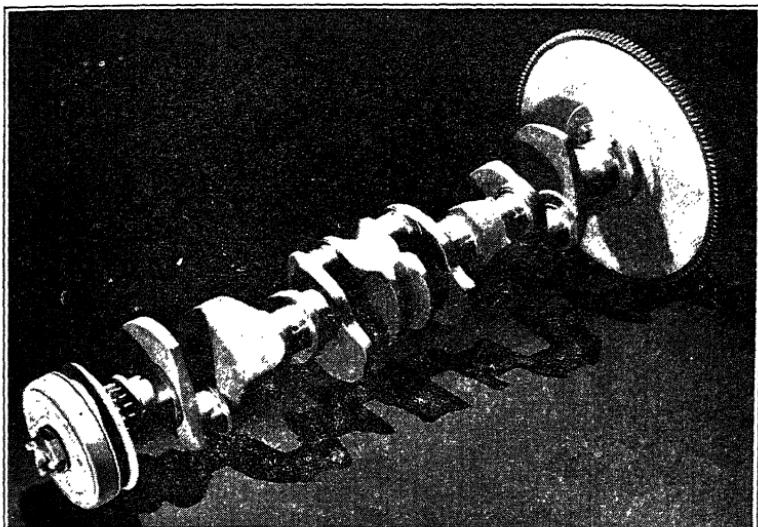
Oldsmobile Six (1937) Crankshaft, Flywheel and Vibration Dampener
